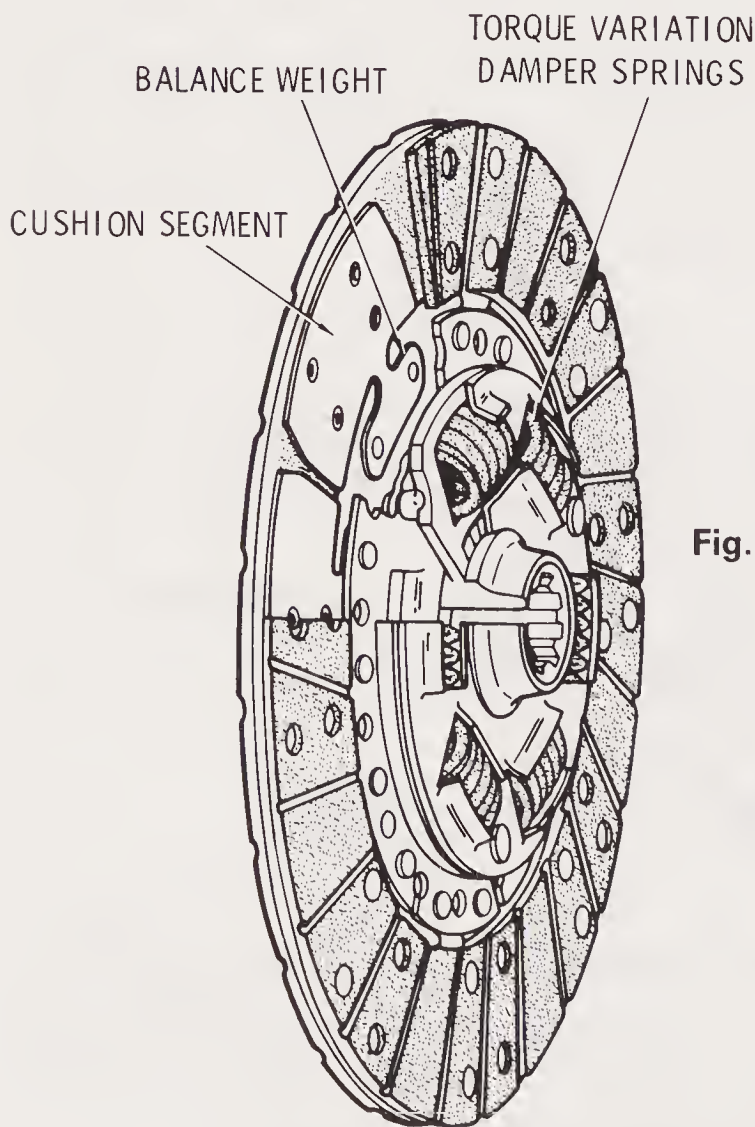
Driven clutch plate assembly showing cushioning devices.
